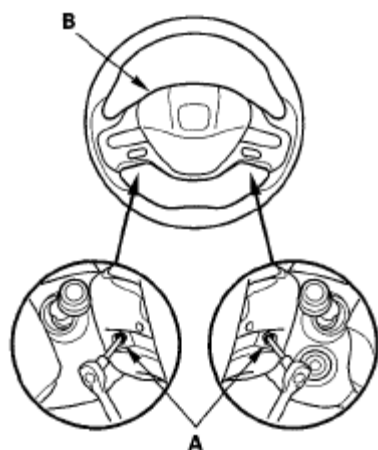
Identifying Torx Bolts And Driver's Airbag
